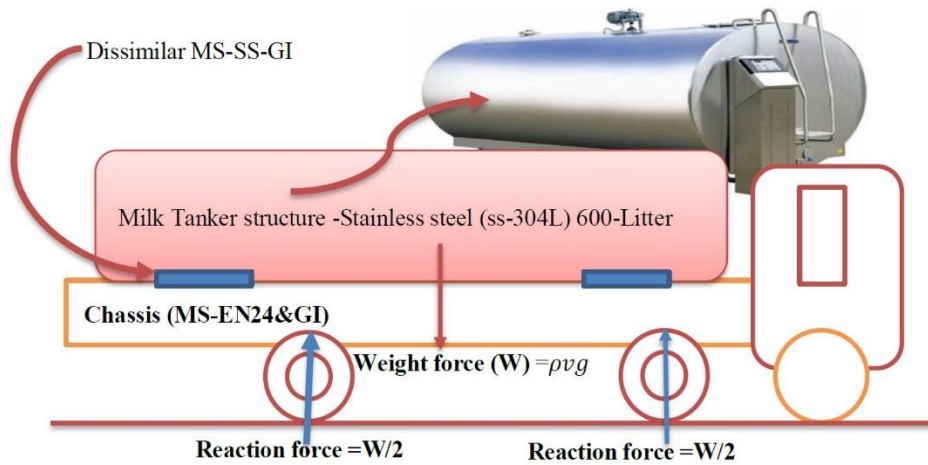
Actual application of SS-MS-GI dissimilar welded joint in milk-transported structure
